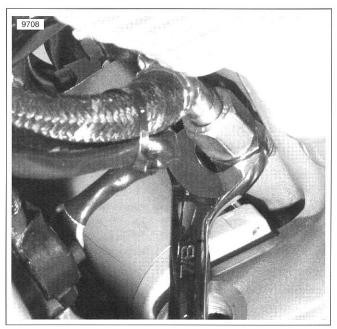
Holding Oil Line Fitting with Angled Wrench
